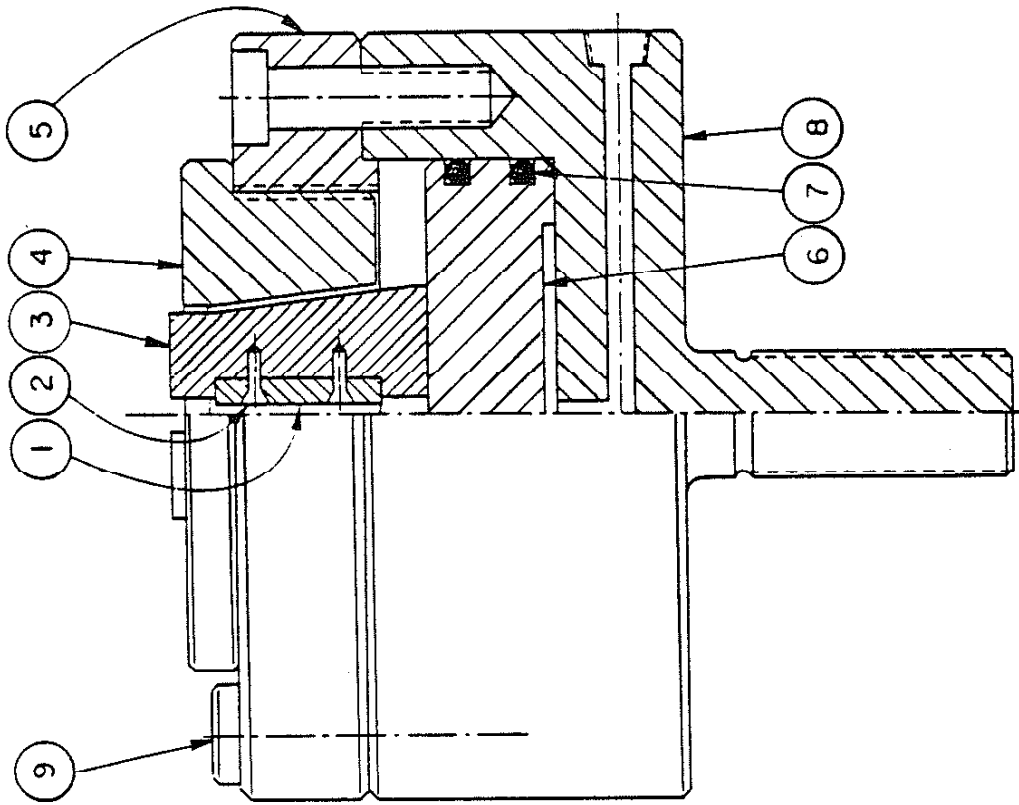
Schematic Diagram of Hydraulic Grip for R=-1 Test on Tensile-Shear Spot Weld.
